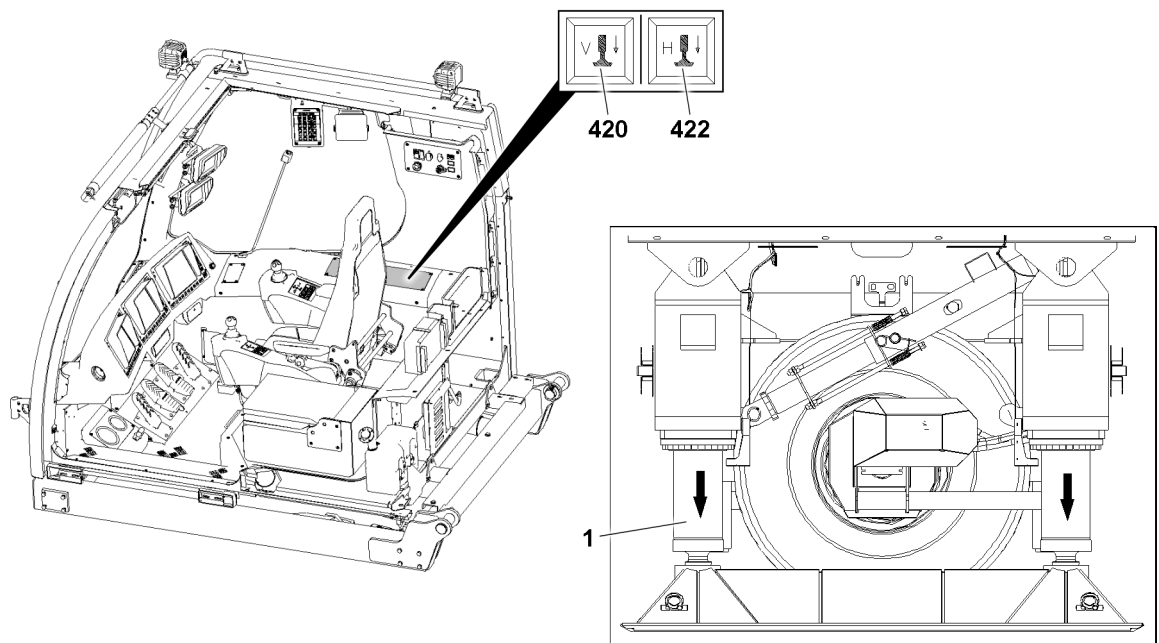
Extending the support cylinder using the button on the crane cab instrument panel
